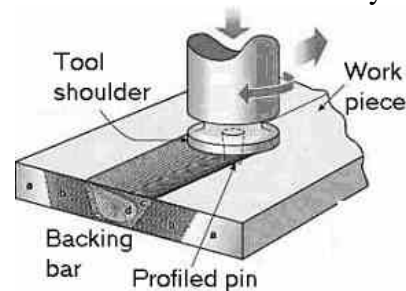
Friction stir welding process invented at TWI (reproduced from [2])
